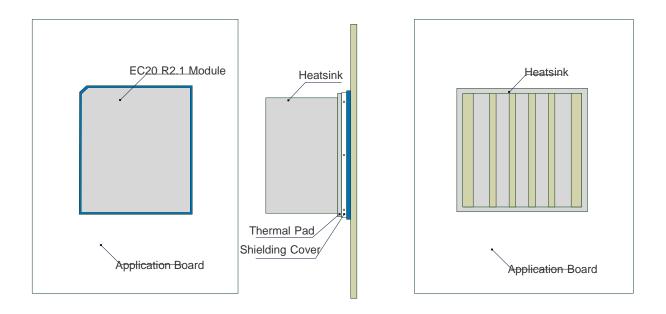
Referenced Heatsink Design (Heatsink at the Top of the Module)
